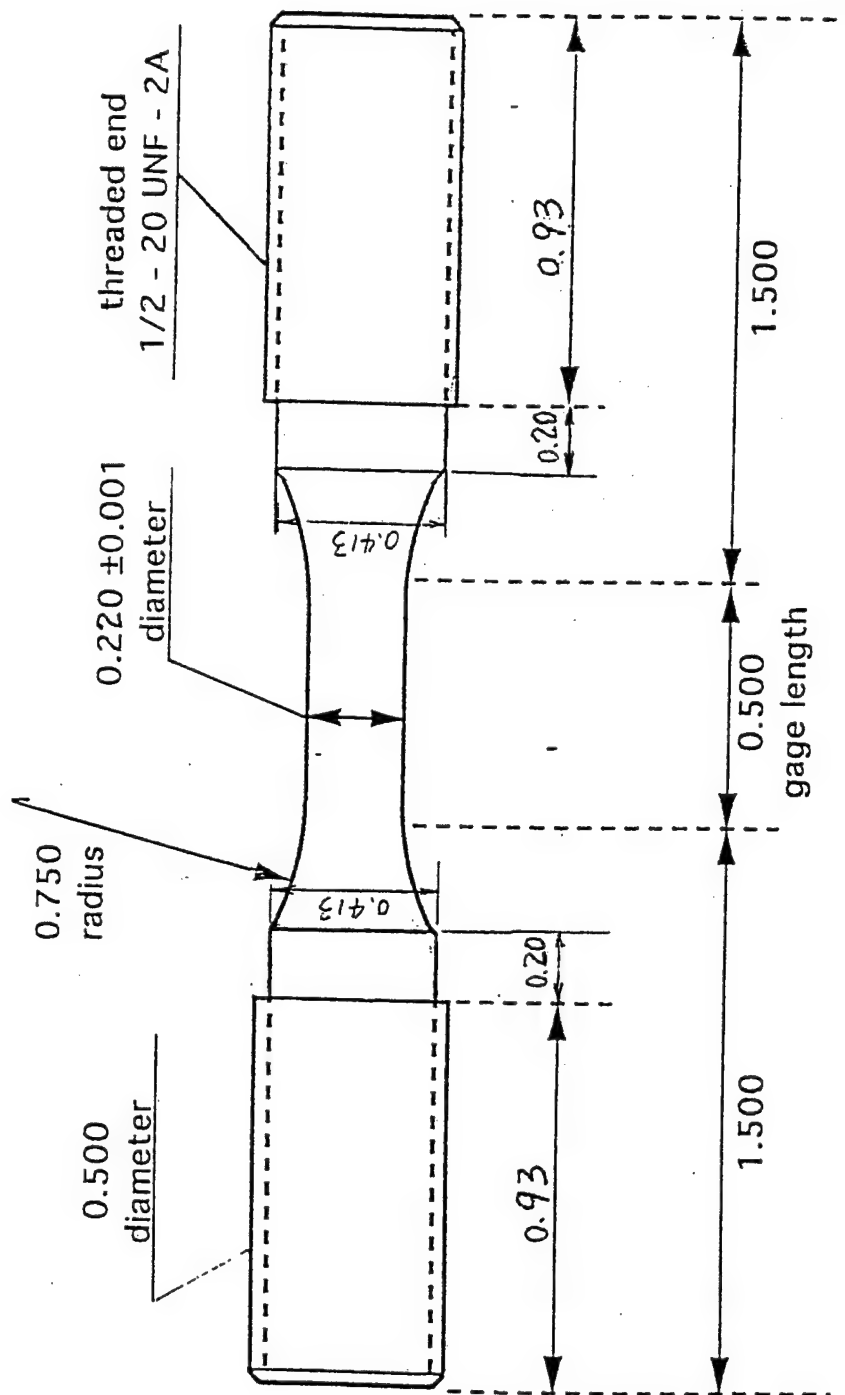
Specimen design used for smooth specimen fatigue testing at Penn (dimensions in inches where 1 inch=25.4 mm).
